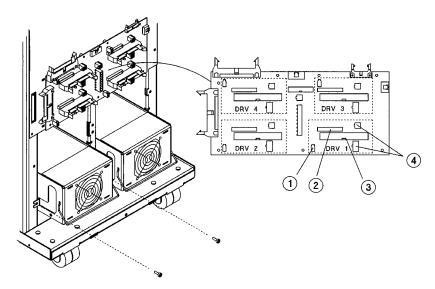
Removing Drive Cables and Enclosure Mounting Screw
